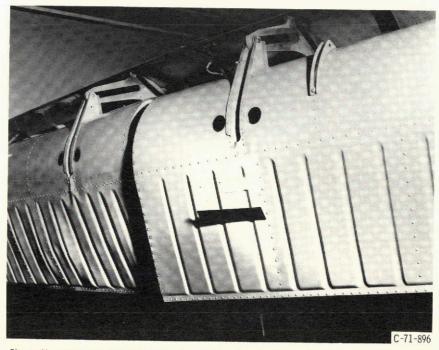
Damage to upper surfaces of right inboard and outboard wing flaps. Flap control rods disconnected with flaps hanging from flap tracks.
